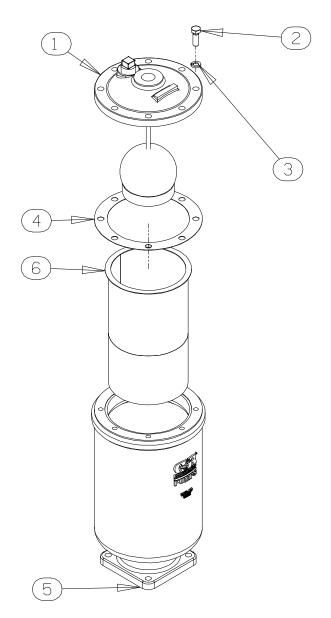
46112—709 Priming Chamber Assembly PARTS LIST
